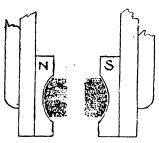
Section of Magneto showing Coils in Horizontal Position.
